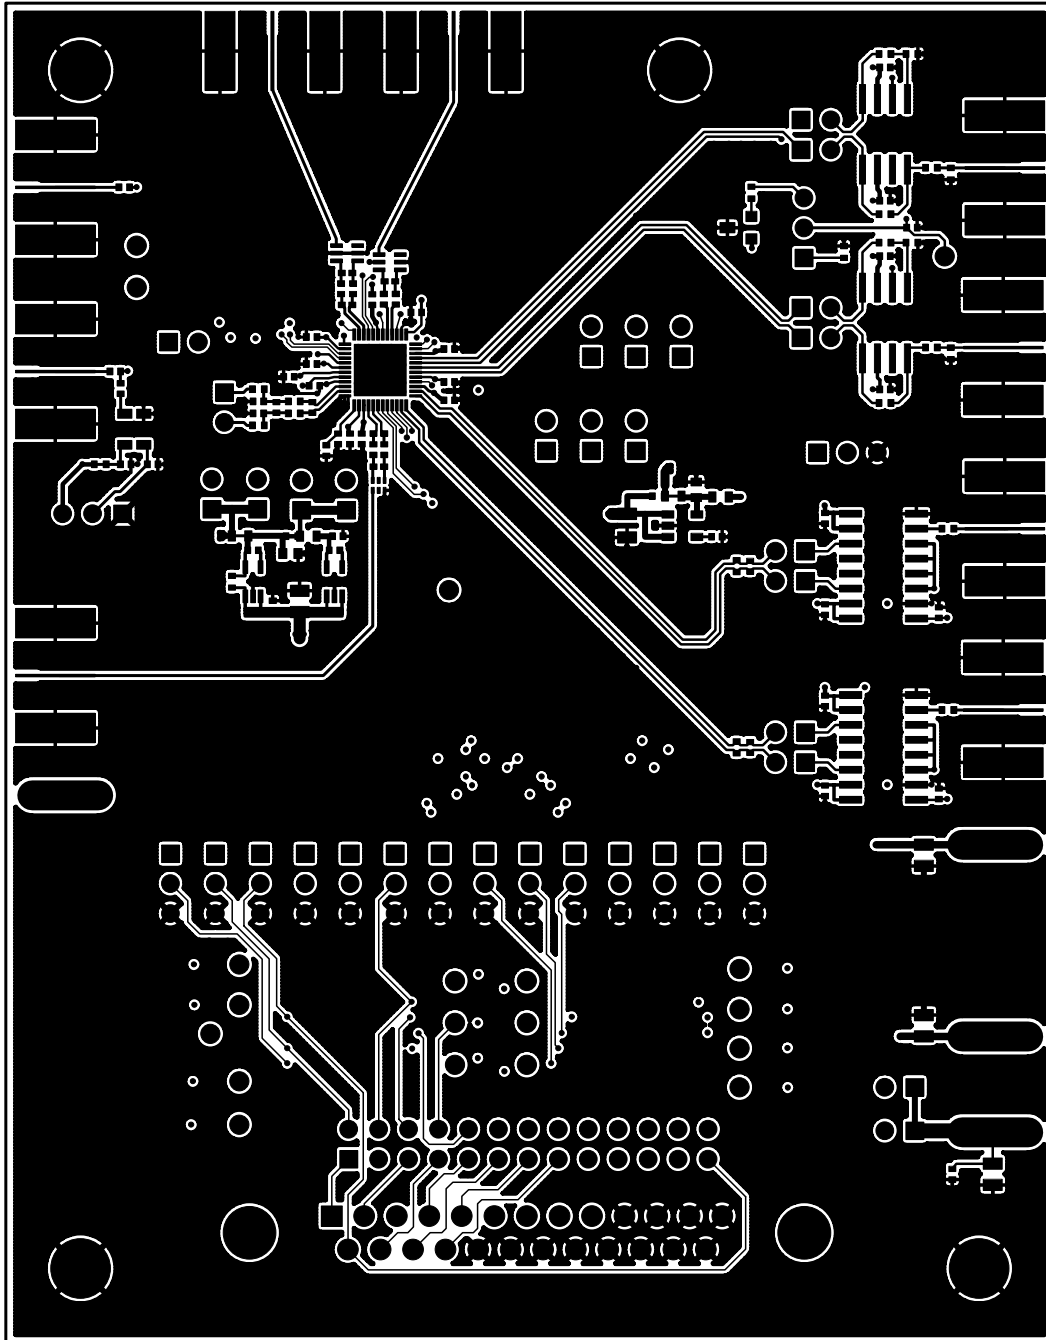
MAX2838 EV Kit PCB Layout—Component Side
